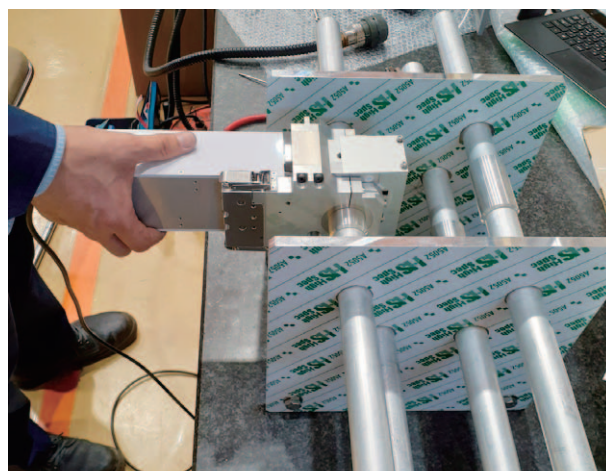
Automatic welding machine developed for welding cooling pipes.
